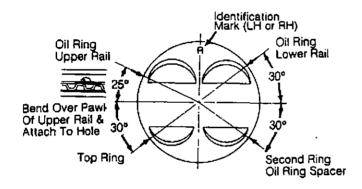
Positioning Piston Rings Courtesy of Subaru of America, Inc.
